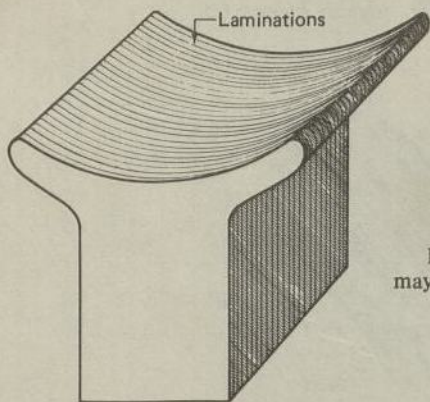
A laminated field core. This may be bolted to the frame.
